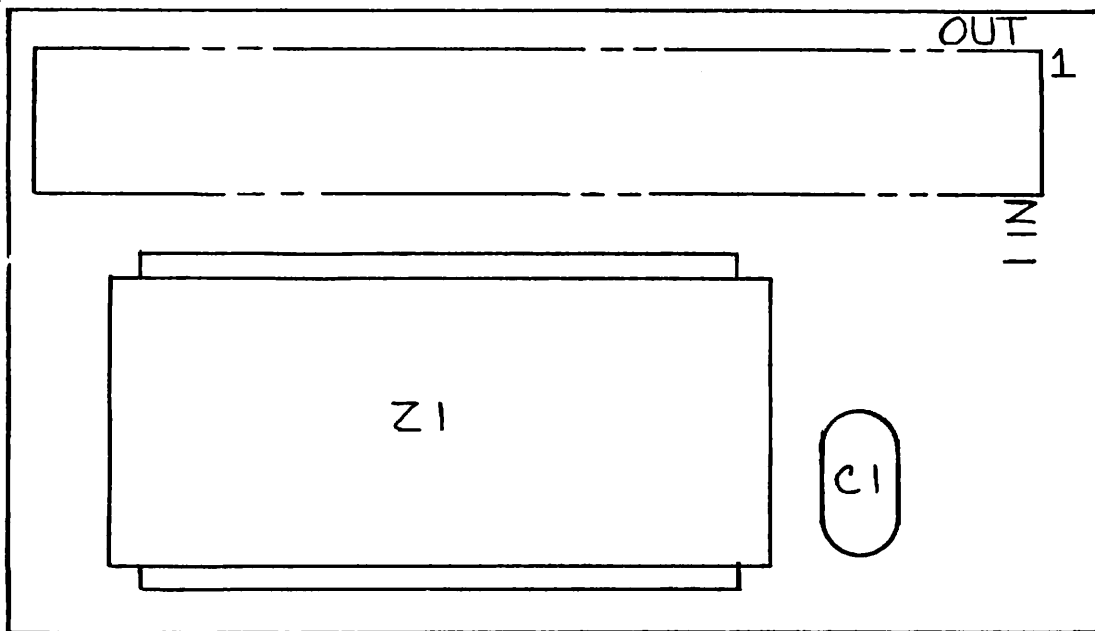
Degrees-to-Minutes Converter Option, Parts Locator
